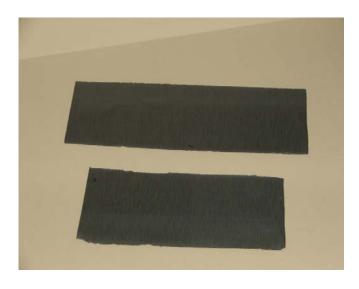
Transfer tape of TiBraze375 brazing filler metal, thickness 0.008 in. (0.2 mm)
